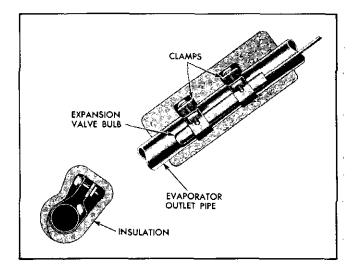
Thermostatic Expansion Valve Bulb at Evaporator Outlet Pipe
